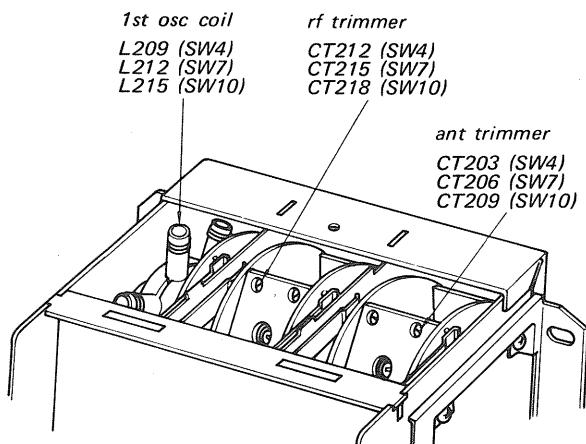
Adjusting parts for SW4, SW7, SW10
